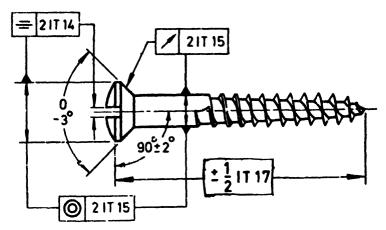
TOLERANCES FOR SLOTTED RAISED COUNTERSUNK HEAD WOOD SCREWS
